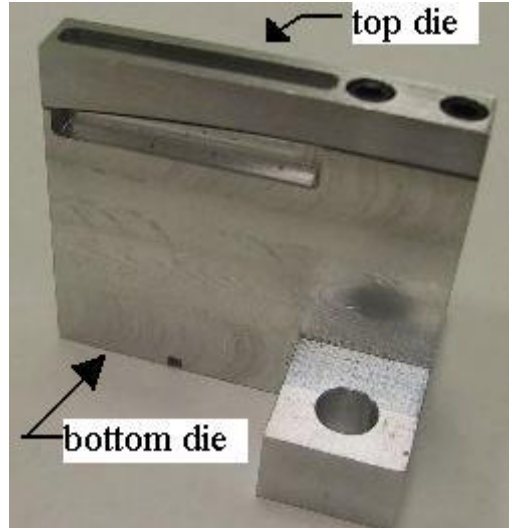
Fixture. The top and bottom dies are screwed together.
